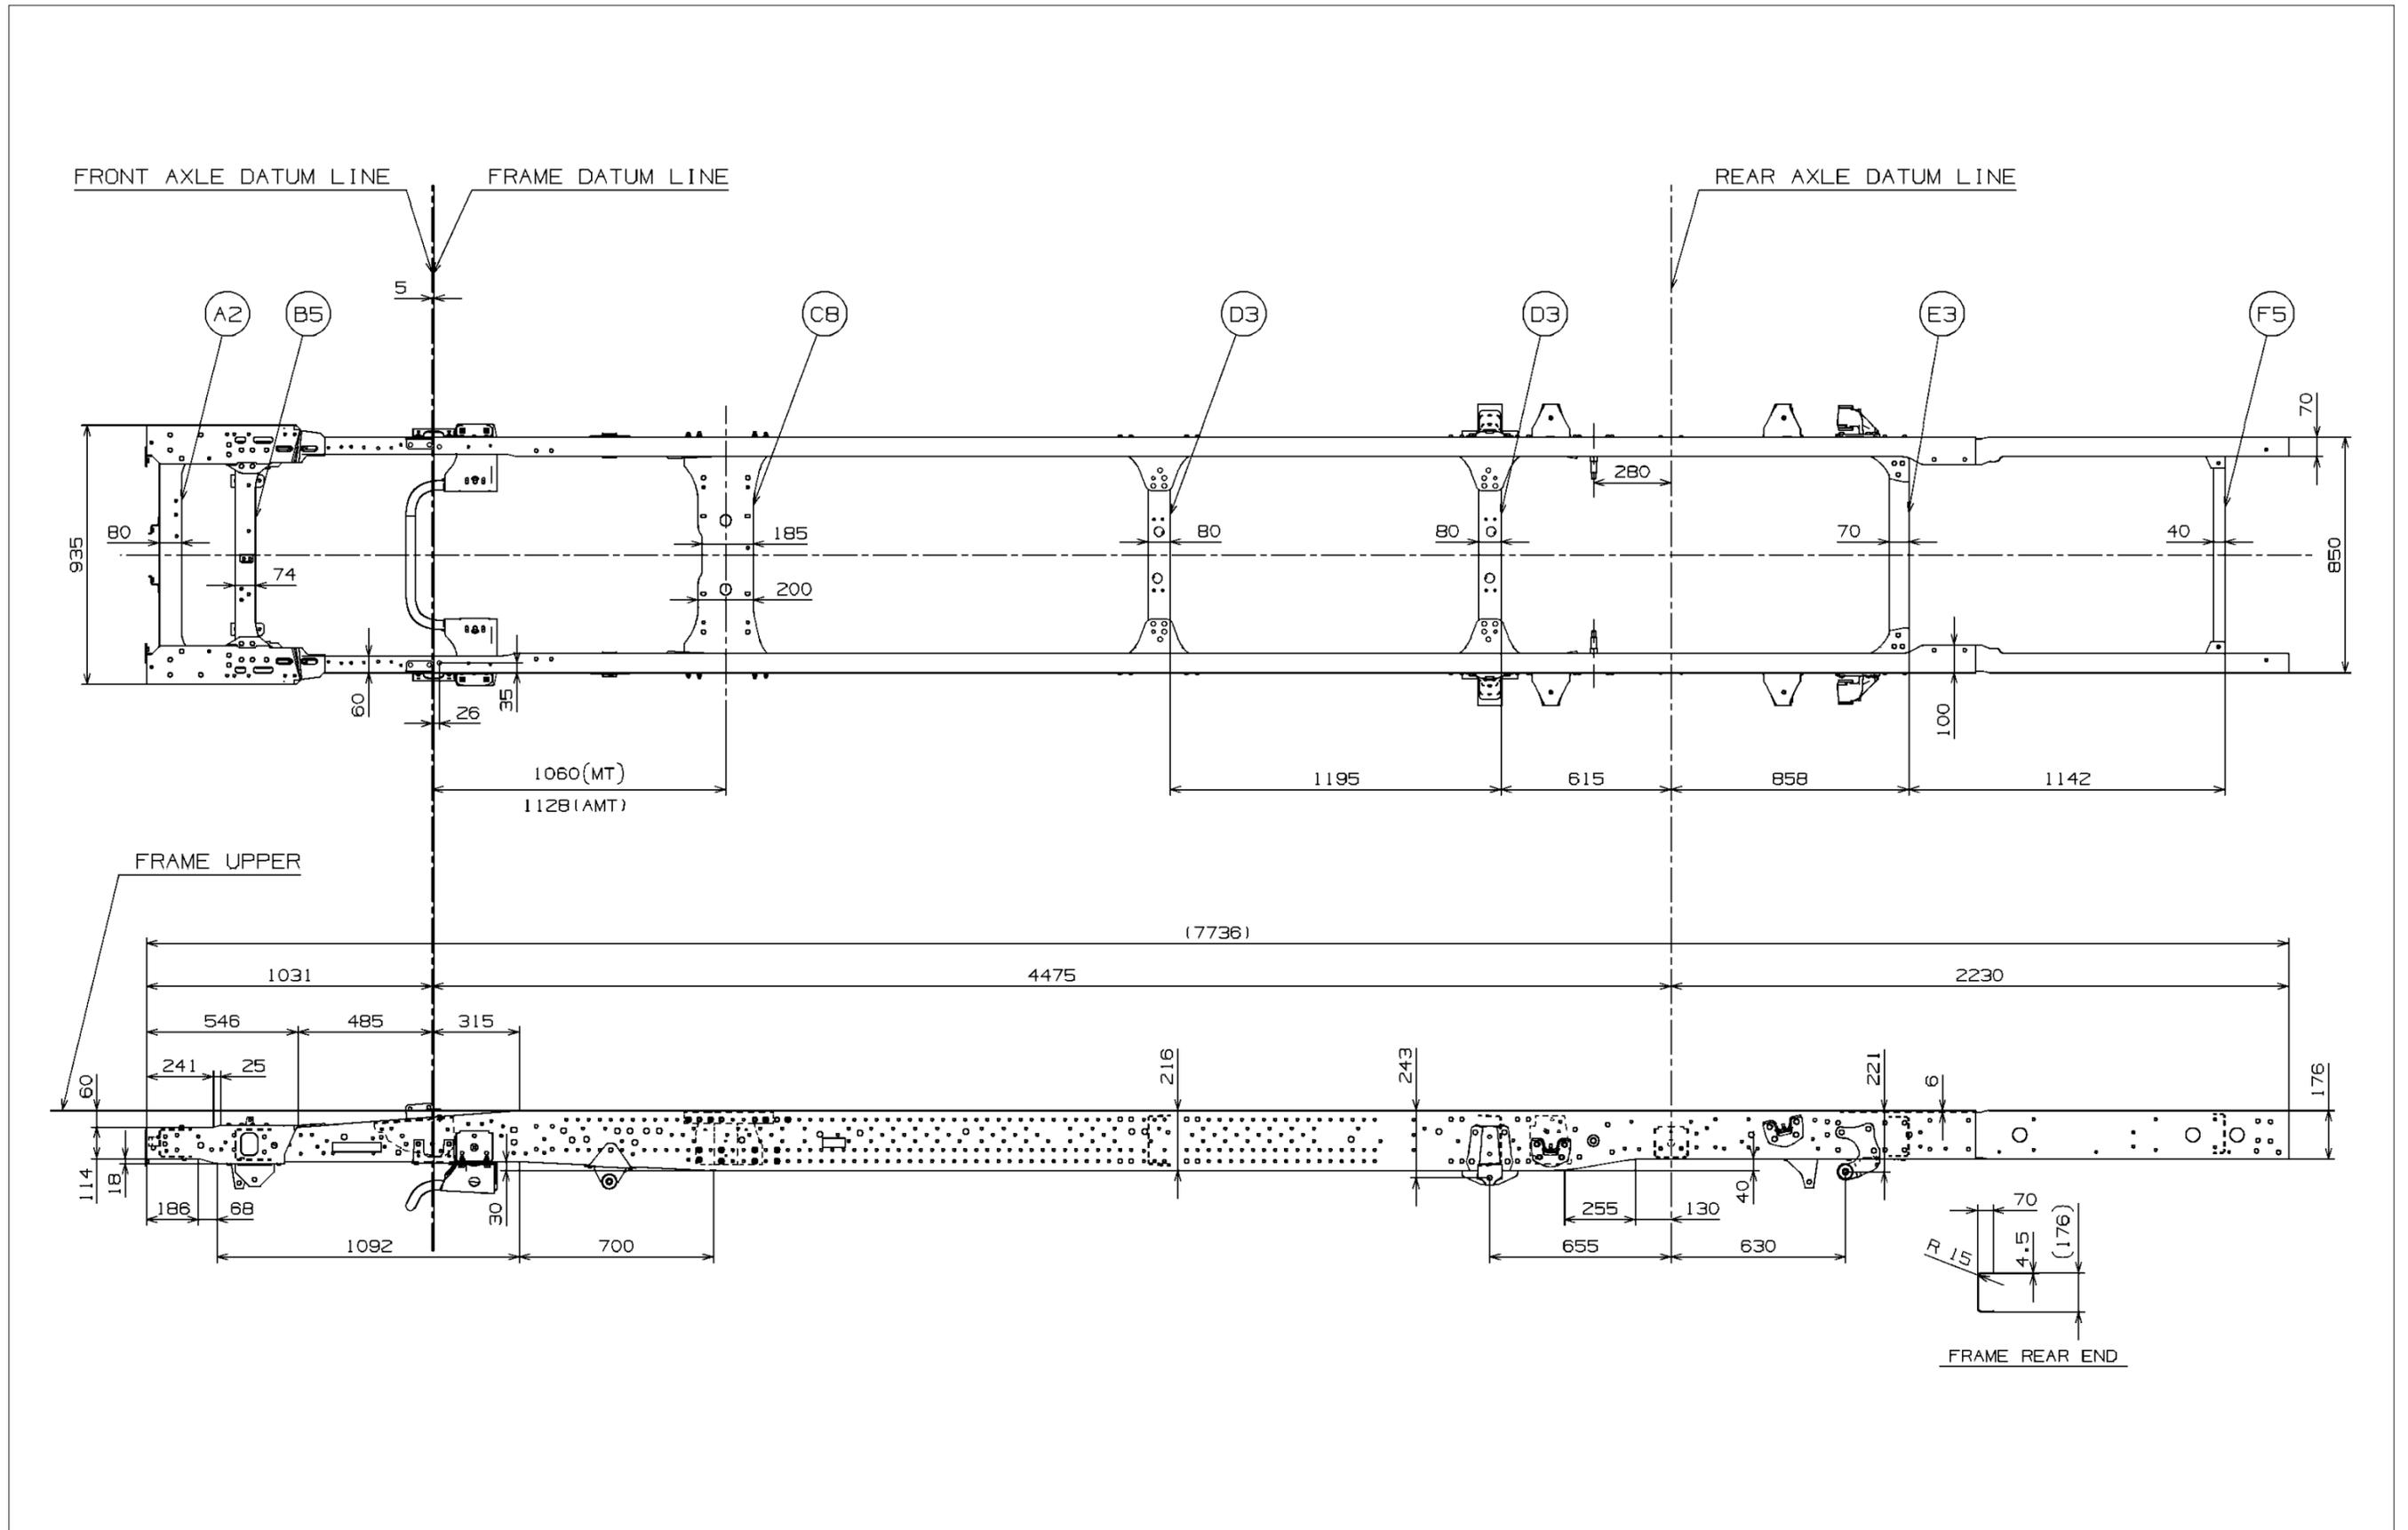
Chassis Frame Drawing NPR75L/U-HL5VAYE
